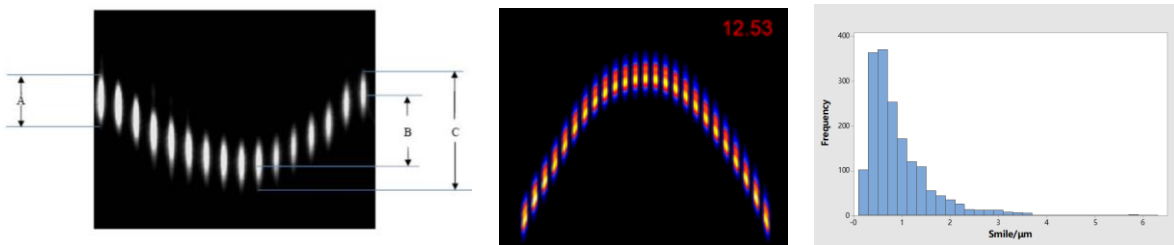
SMILE definition (left), typical SMILE of a 1 cm wide bar AuSn soldered on a HMCC (mid) and SMILE distribution of 1733 pieces of 1 cm wide bar AuSn soldered on DMCC (right) .
